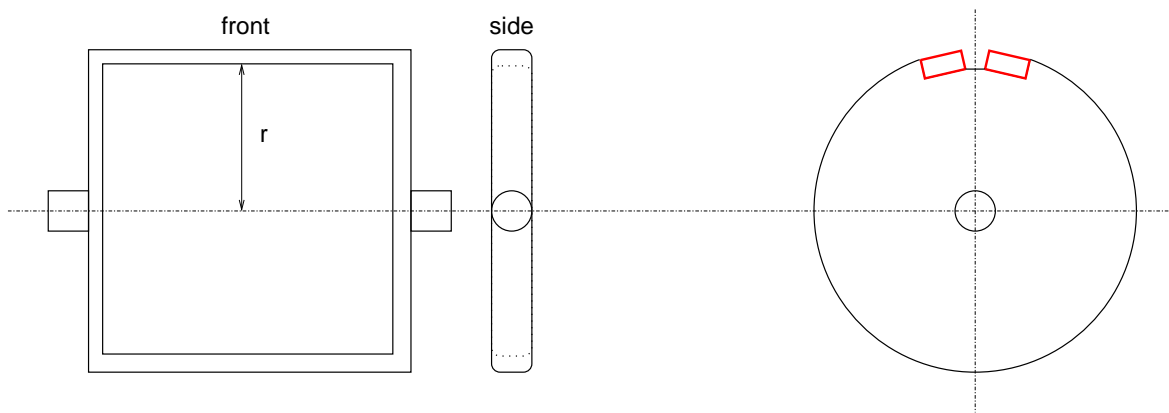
Left*: Scheme of the frame used to collect the wire before the upgrade. This frame is mounted in the rotor axis (see the left picture of figure 3.5). At the end of the winding process, two sets of wires are collected, one per side. These can be used to produce two wire-grids whose size will be a bit smaller than  $\sim 2r$ , the size of the frame. *Right*: Section of the cylinder that replaced the rectangular frame. The wires are glued onto the two bars (cross-section drawn in red) fixed into the cylinder (see also figure 3.8). At the end of the winding process the wires are cut along the gap between the two bars. We get just one set of wires but the size is now  $\sim 2\pi r$ .
